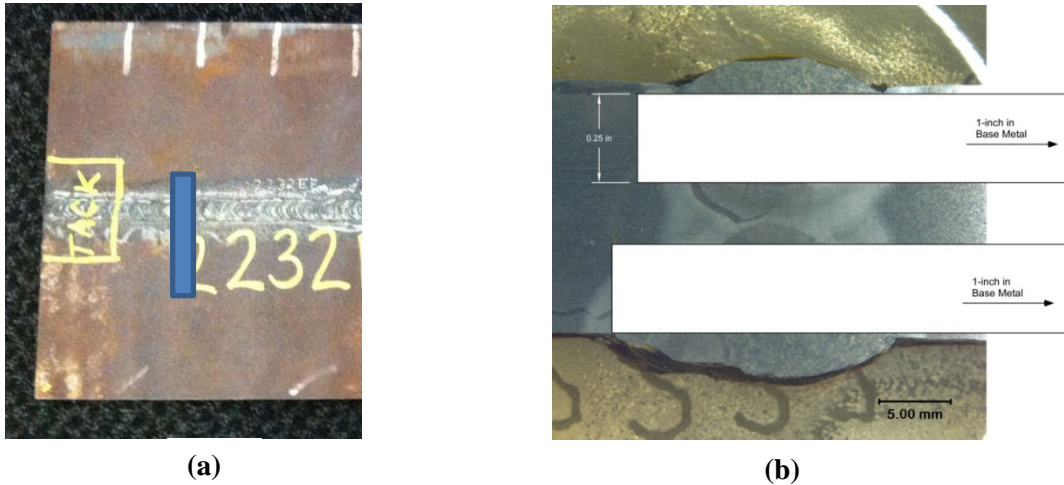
Pictures of carbon steel specimens for LAI and TI experiments: (a) representation of the selection of the specimens in the panel (blue rectangle) and (b) side view of the panel and representation of the selection in the weld and HAZ (white rectangles)
